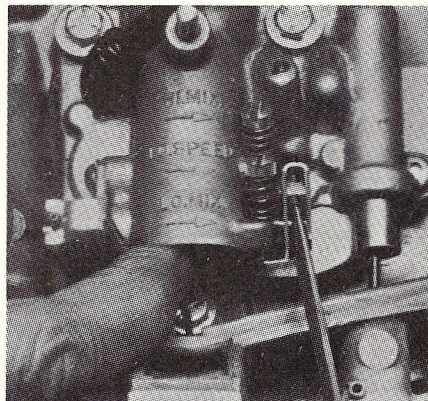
Keep finger on throttle butterfly as shown when adjusting carburetor. Refer to text for procedure.
